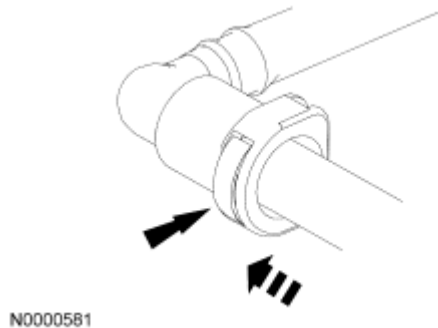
Locating Fuel Tube Quick Connect Coupling Button
